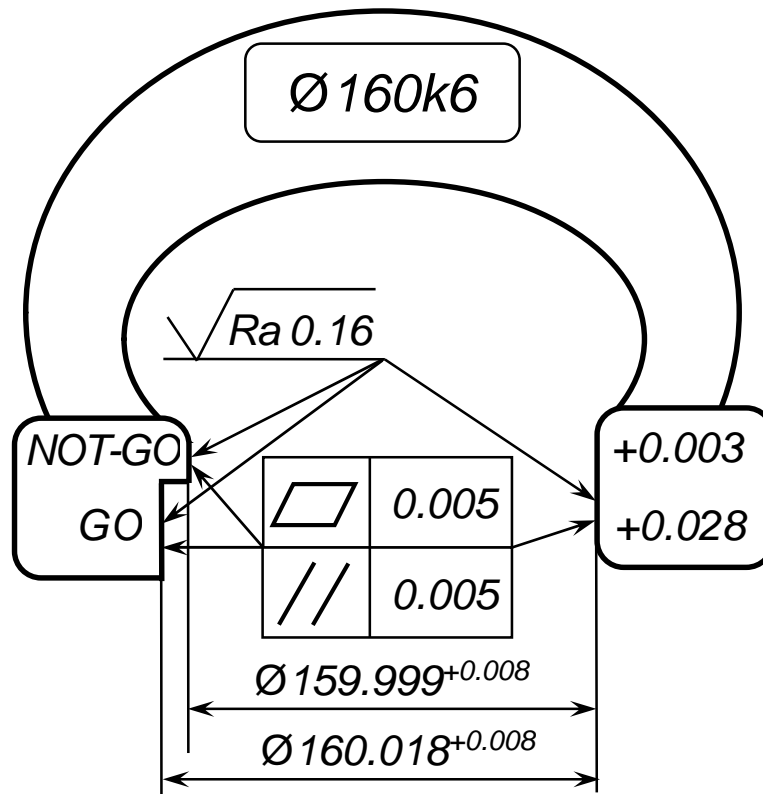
Example of sketch for single-end double-limit snap gauge for check of shaft part Ø160k6
